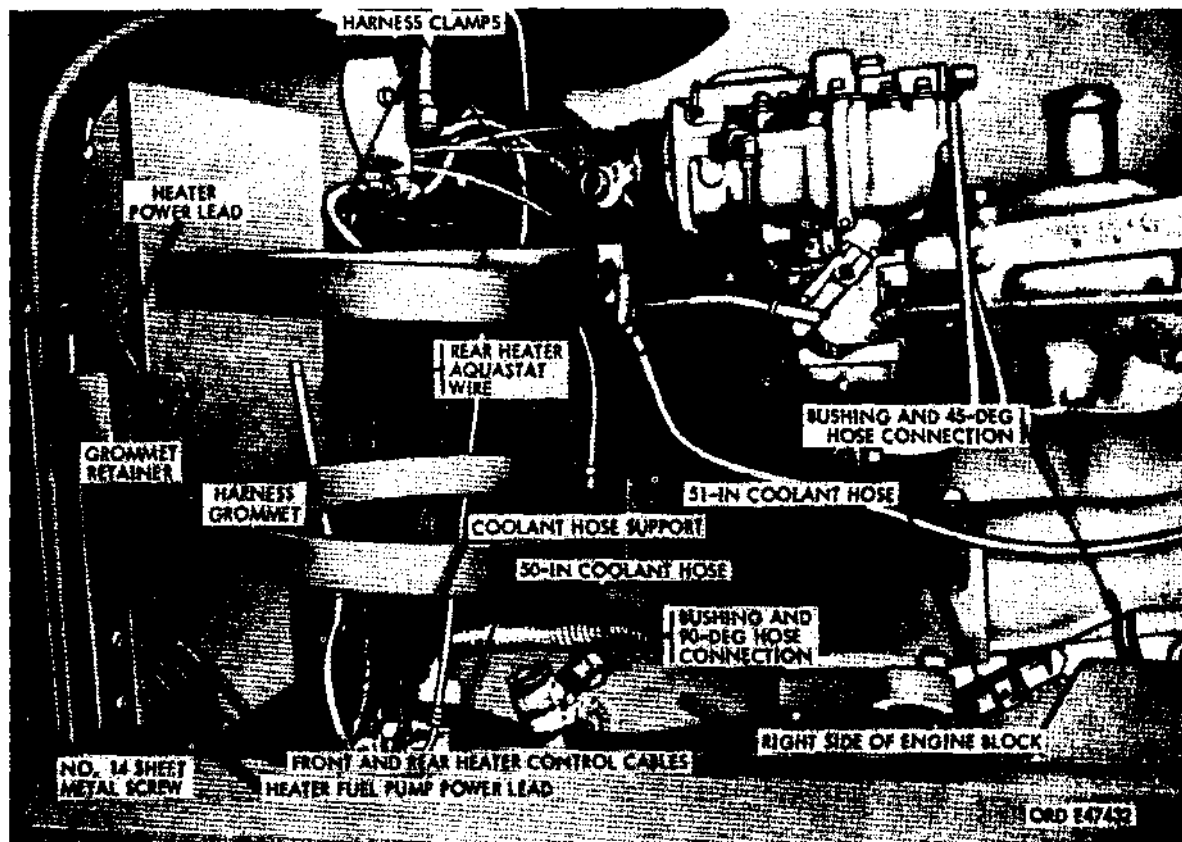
Front and rear coolant hose connections installed on right side of engine block
